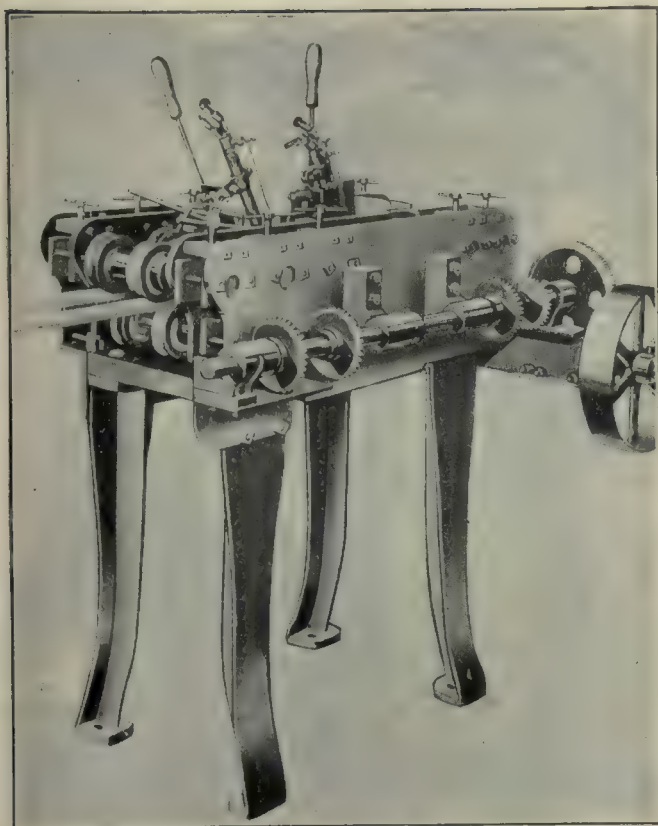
DUPLEX TUBE WELDING MACHINE
